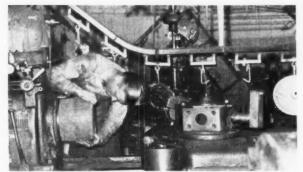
Castings are carried to this turning operation by overhead conveyor; then by gravity roller conveyor to subsequent milling and drilling jobs.
